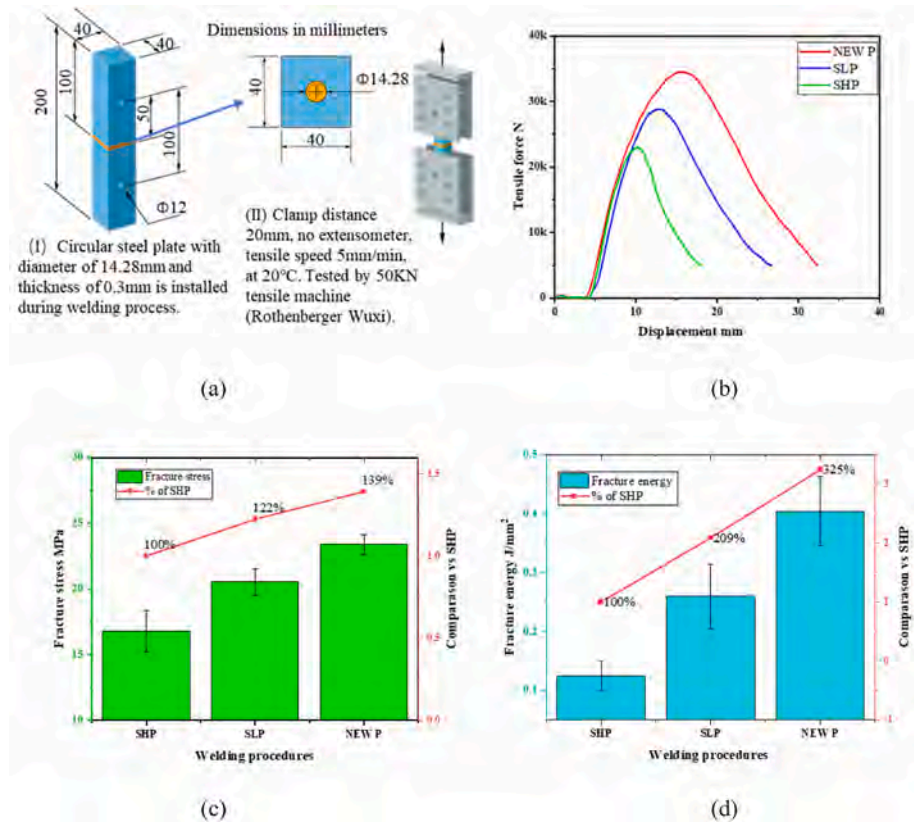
Tensile test with weld interface crack specimens (a) Specimen size and test parameters (b) Representative force-displacement curves (c) Result of fracture stress and welding factors (d) Result of fracture energy and welding factors.
